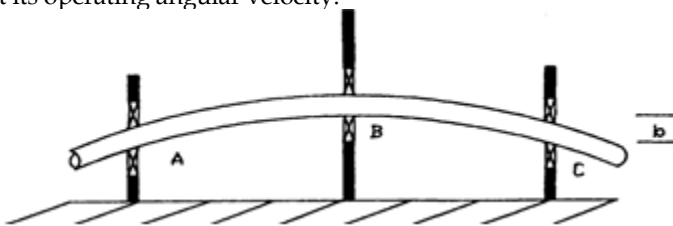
Shaft distorted by bearings connected with the help of suitable coupling.
